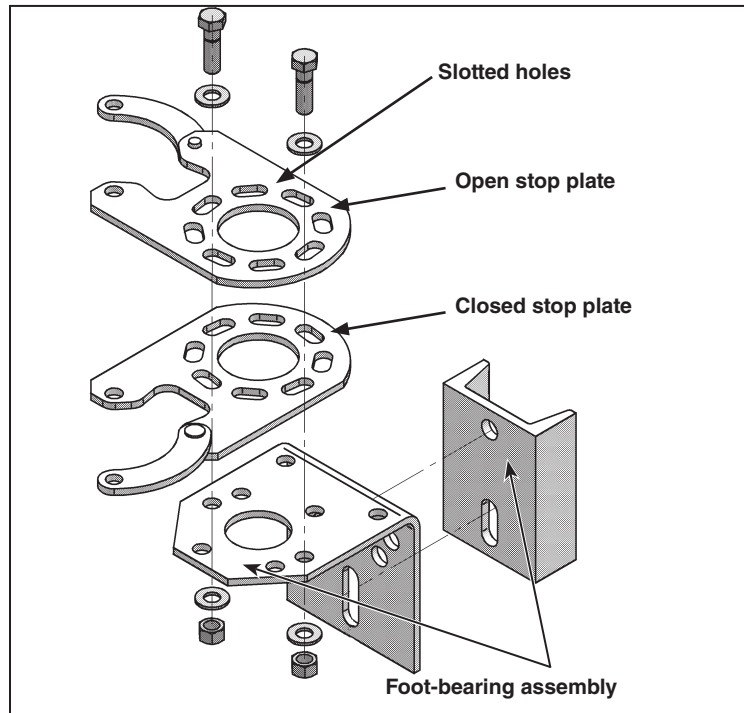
An exploded view of the stop plates and foot-bearing assembly.
